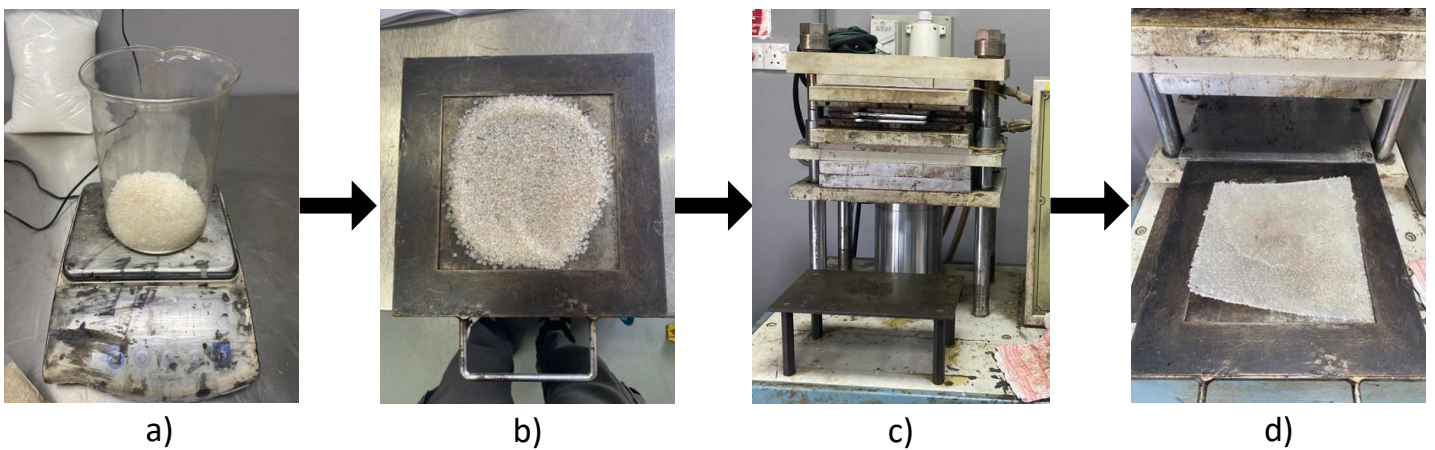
Hot press process (a) weigh r-WoPPC, (b) put in the mold, (c) Hot press machine, and (d) r-WoPPC in pallet form
